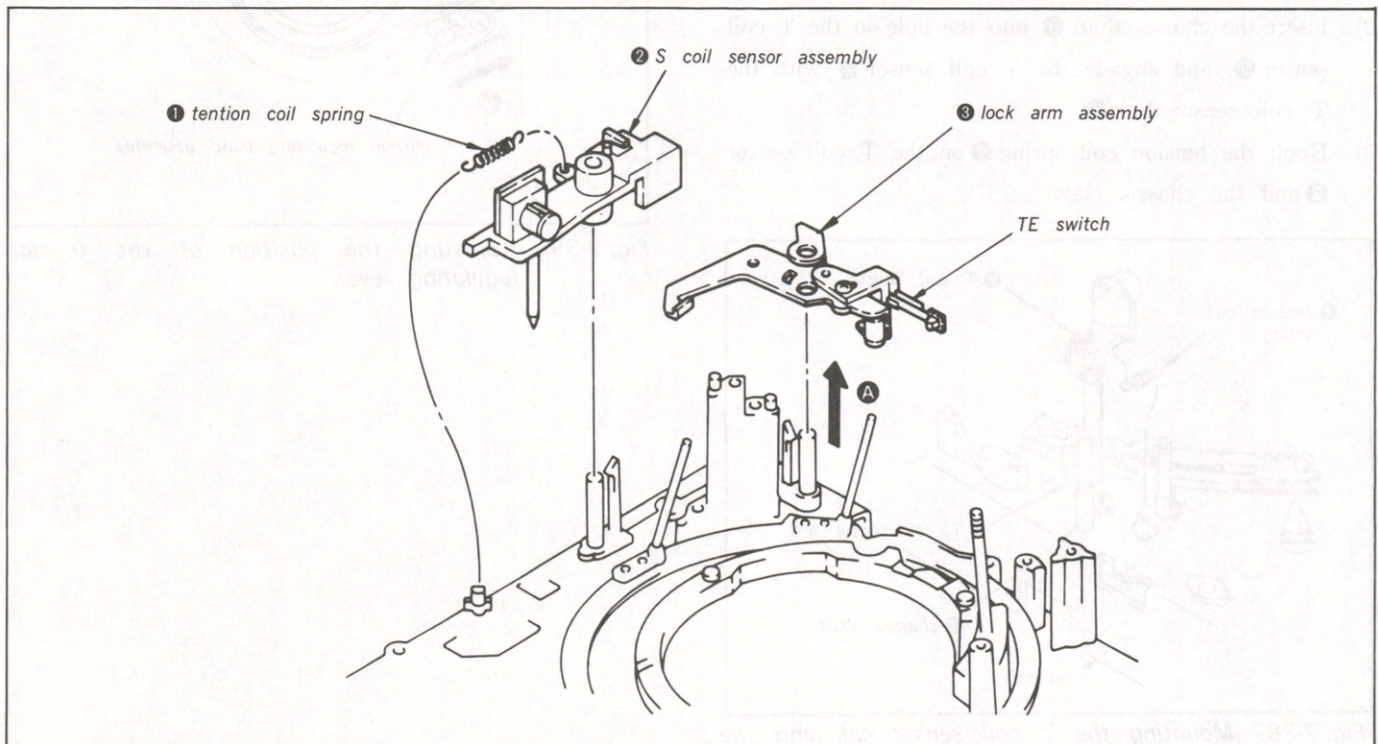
Detaching the lock arm assembly (TE switch) and the S coil sensor assembly.
